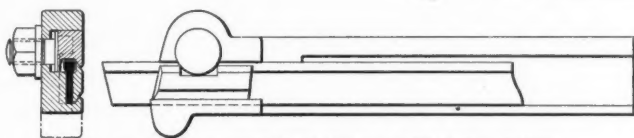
Cutting-off Tool-holder with a Wide Top Cutter.
